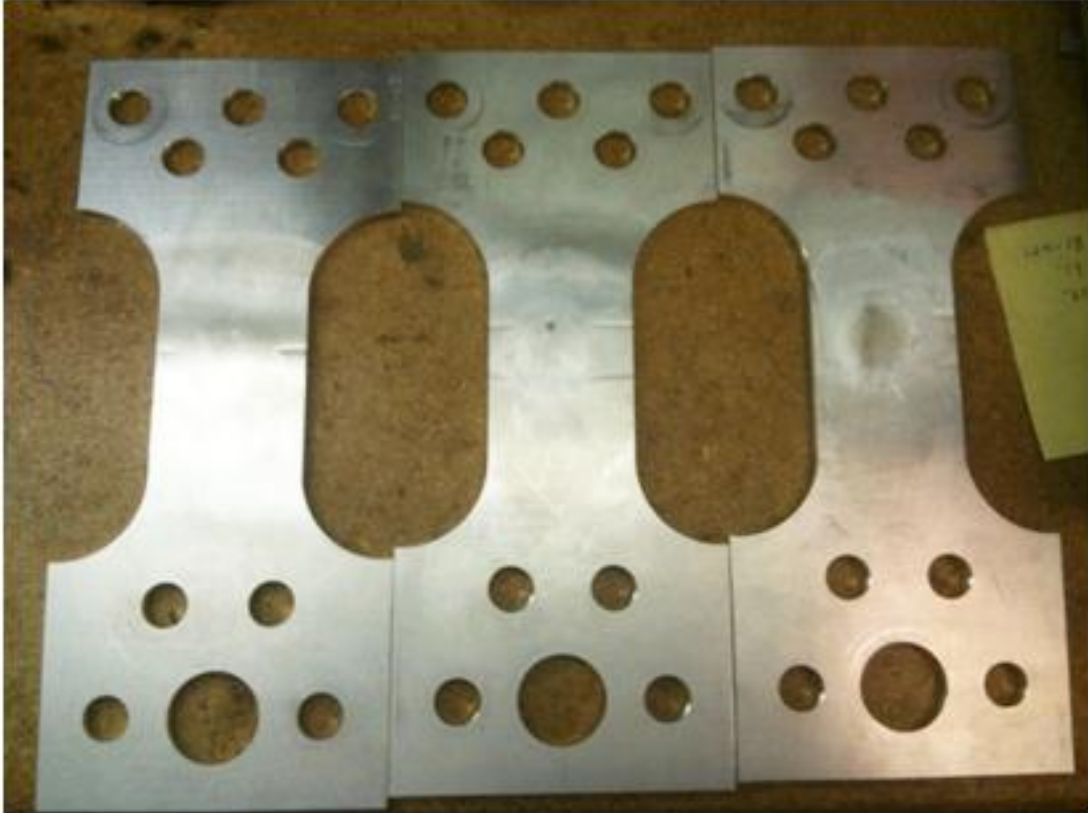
Photograph of 101.6 mm wide test panels with the bolt hold grips on top and bottom.
